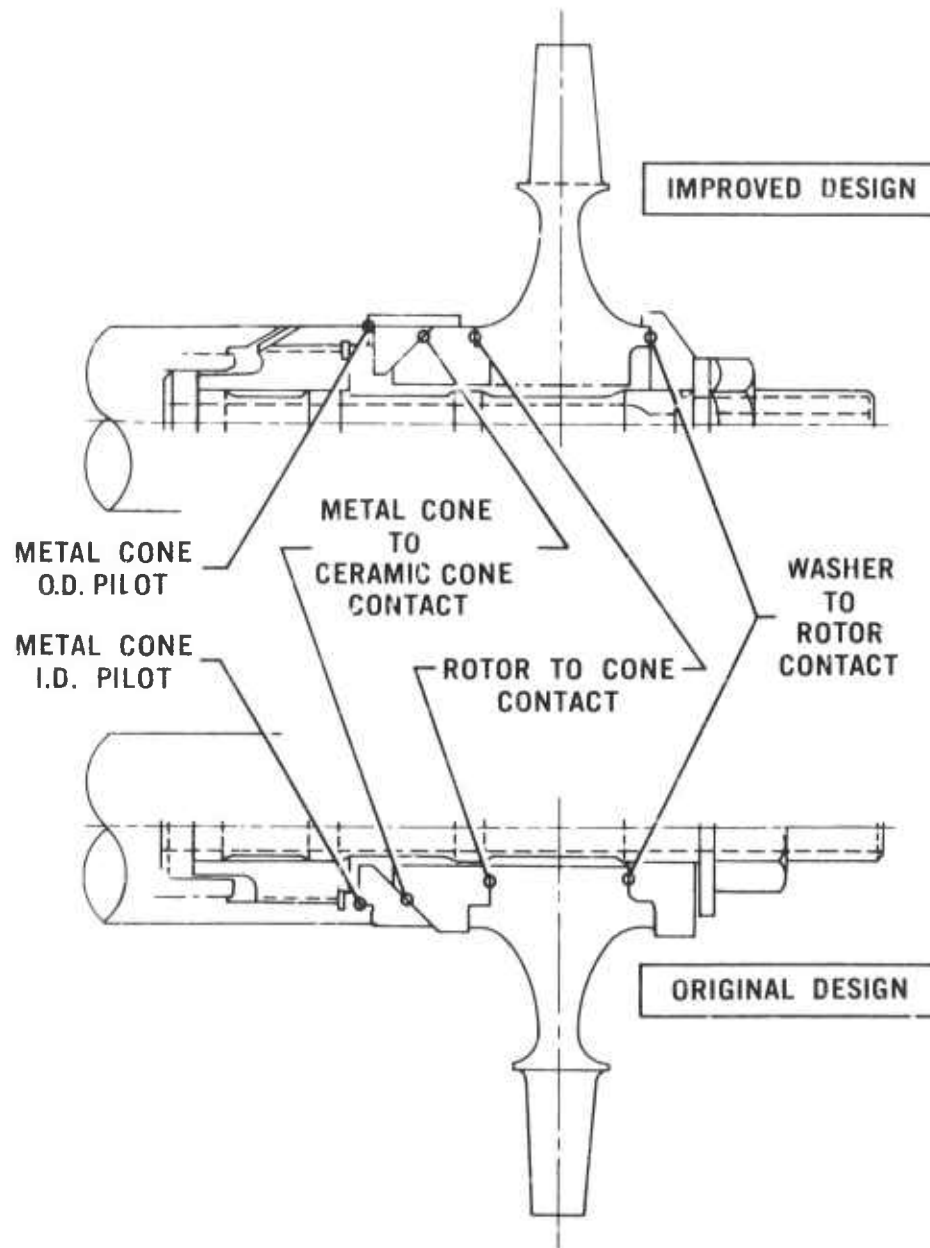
Improved Rotor Mounting Configuration in Hot Spin Rig.
